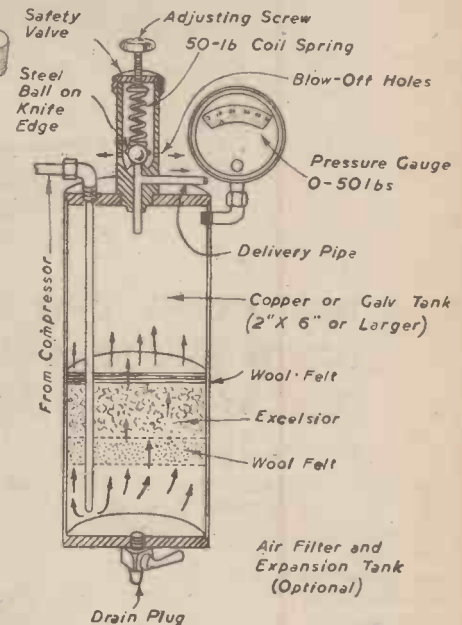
Air filter with a pressure gauge and safety valve attached.
